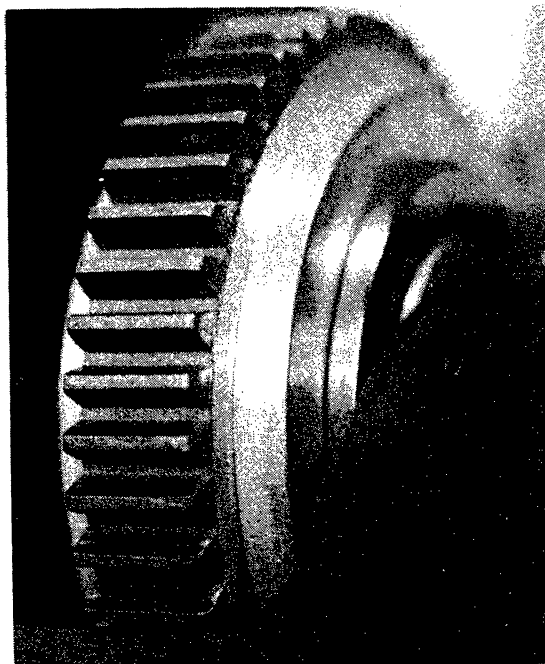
Large idler gear from the SDM inboard actuator. Severe lubricant depletion is evident on the gear teeth.
